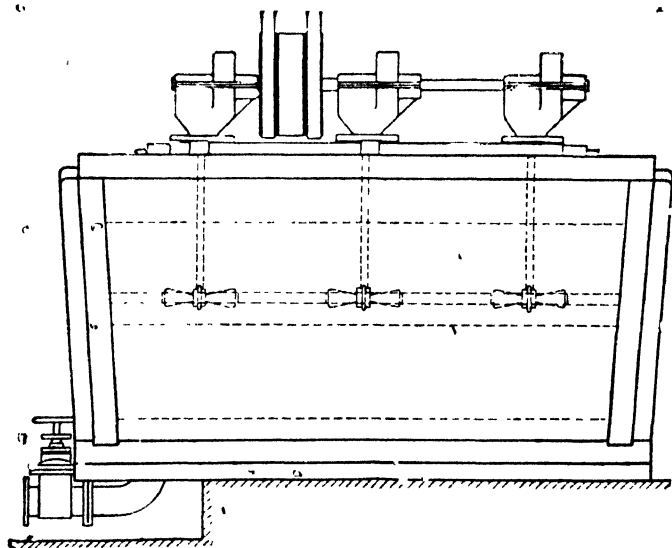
B.—Hank-dyeing machine (cross section). (The Longclose Engineering Co., Ltd.)
